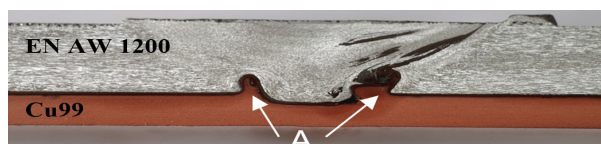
FSW overlap welding EN AW 1200-Cu 99 [19]
